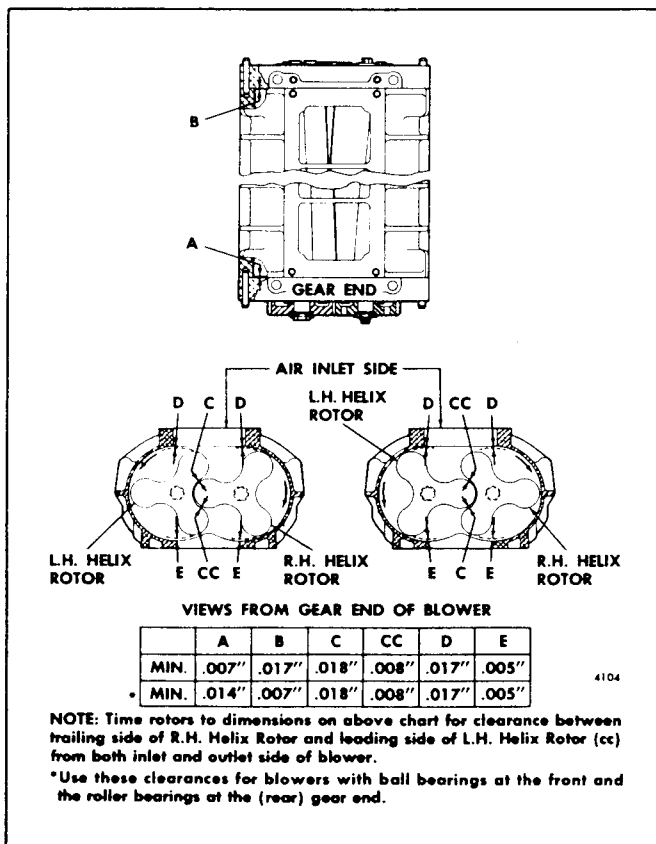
Measuring Clearance Between Blower Rotor Lobes
